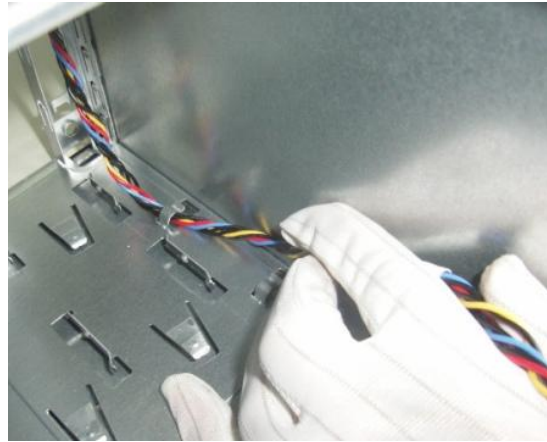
Extrusion the bottom of the power on/off switch and Pull it out of the chassis
